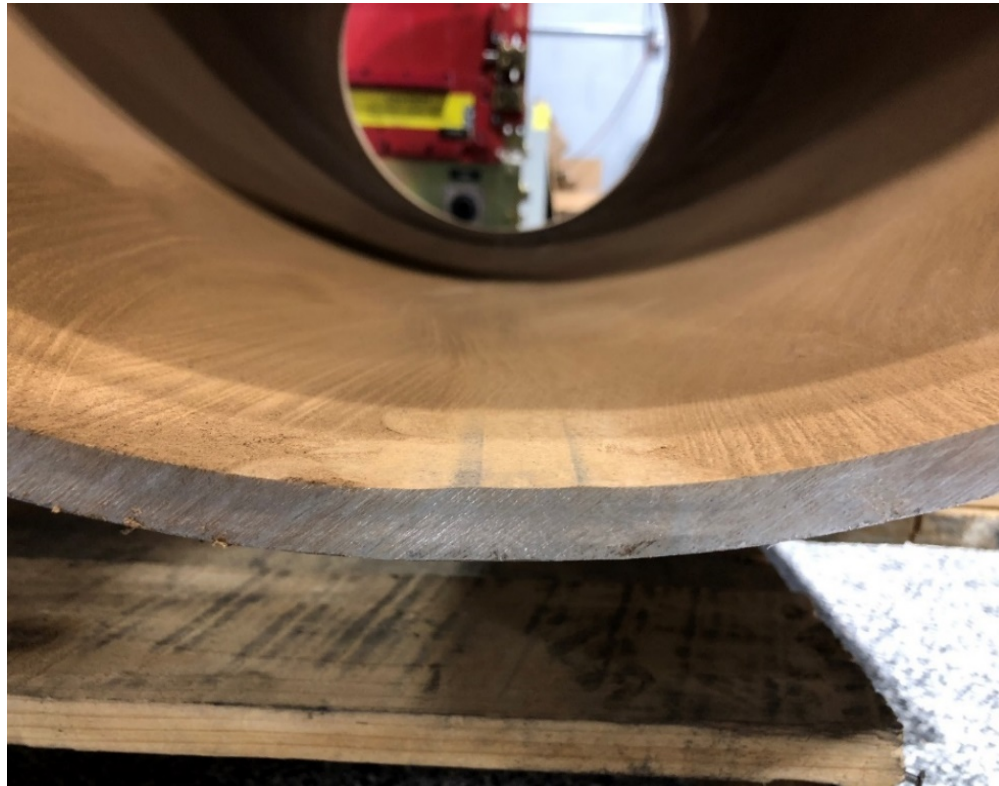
A photo shows the welding line of the 24-inch ERW pipe
